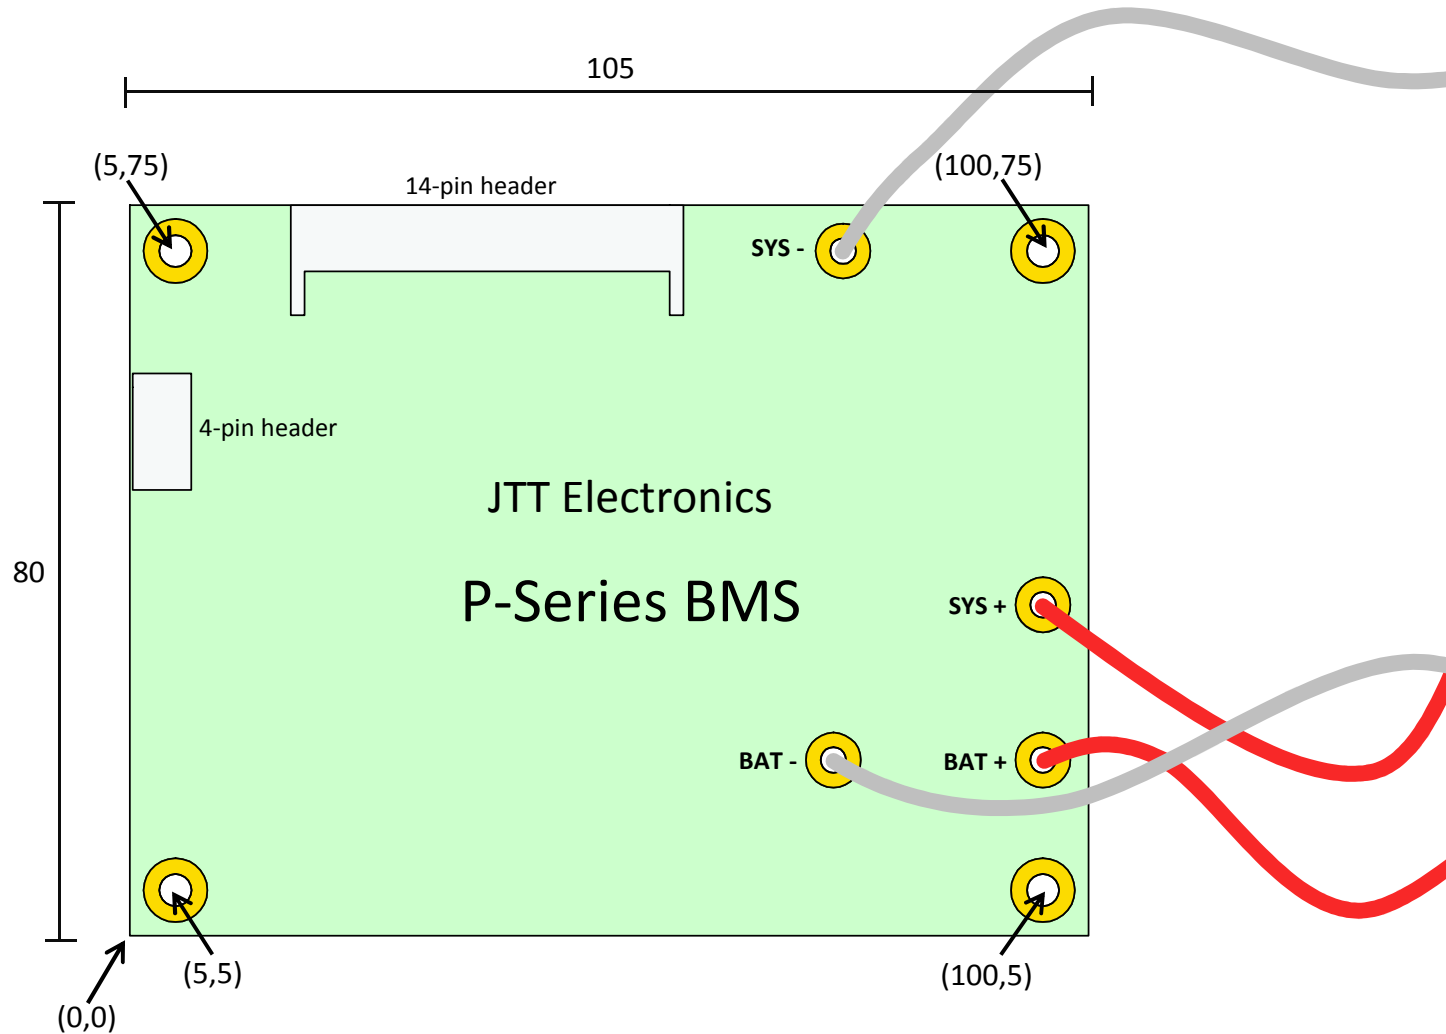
P-Series BMS controller front view with dimensions and mounting hole coordinates.
